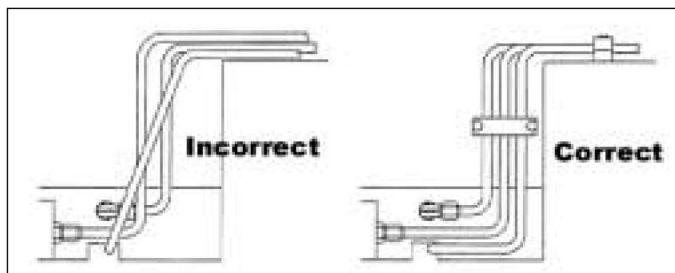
Use bends in hose/tube assemblies to reduce strain on components and to compensate for tolerance stack-up in assemblies.
